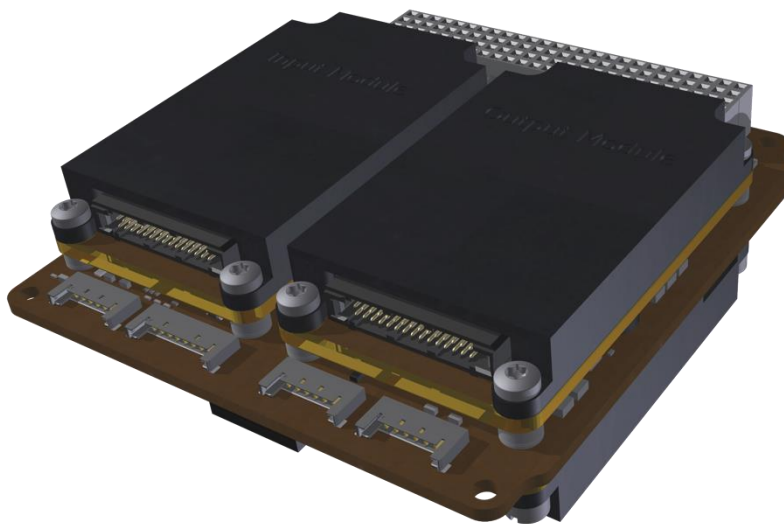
CAD drawing of a NanoDock P60 with four shielded daughter boards
